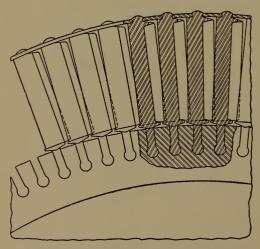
Section of Bucket Wheel of Economy Turbine, Showing Method of Inserting and Holding Blades
